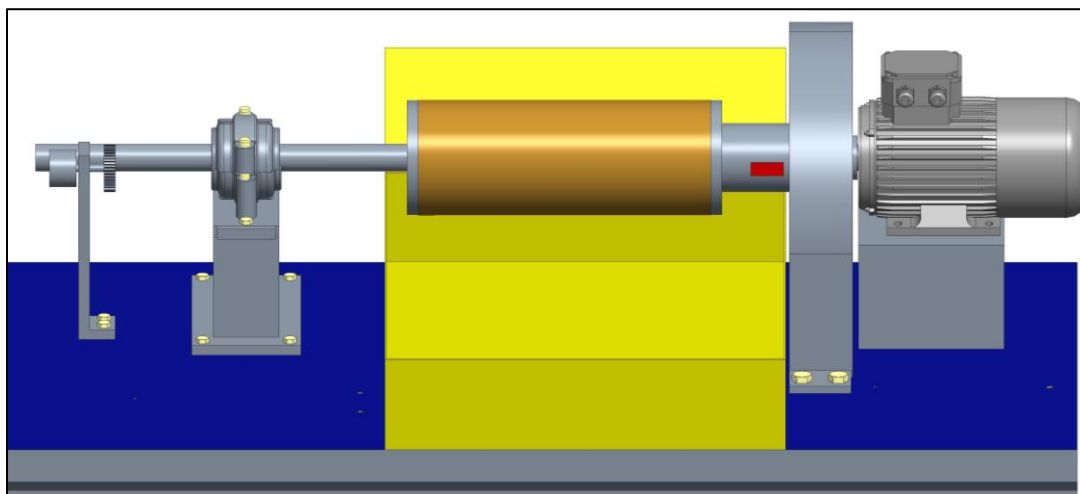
5 - Rotating tool joint on an electric motor shaft
